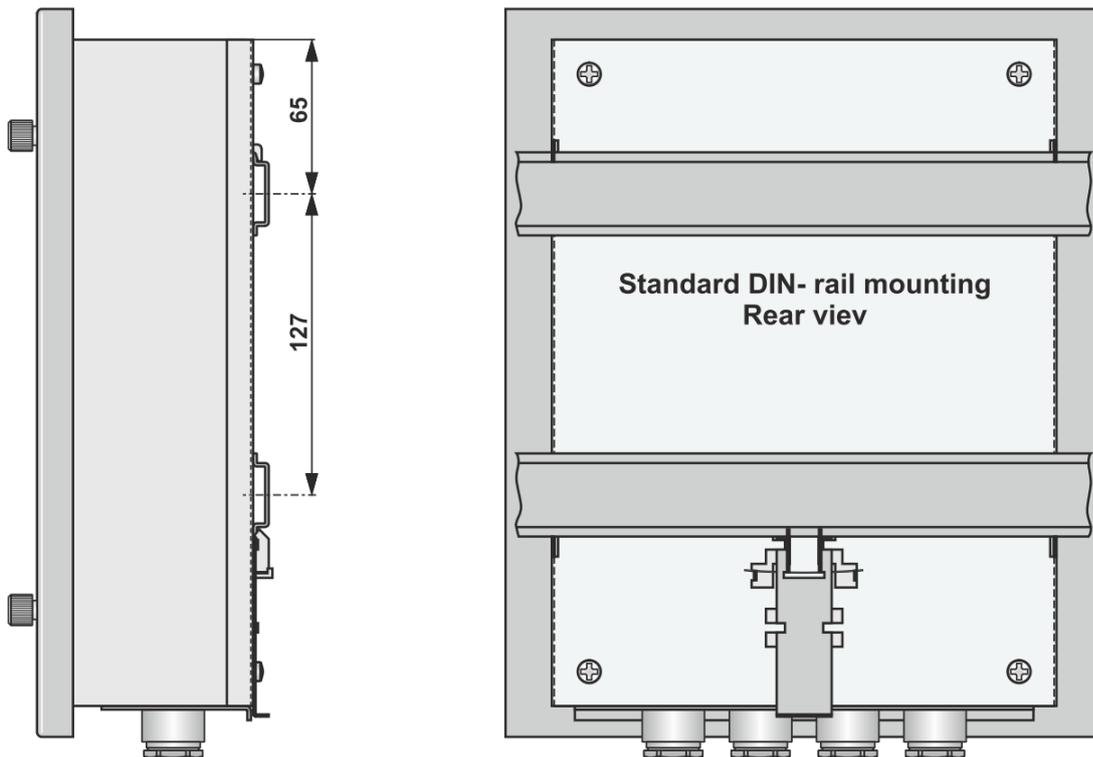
Mechanical dimensions, standard DIN-rail assembling
